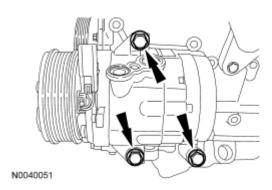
Locating A/C Compressor Bolts Courtesy of FORD MOTOR CO.
